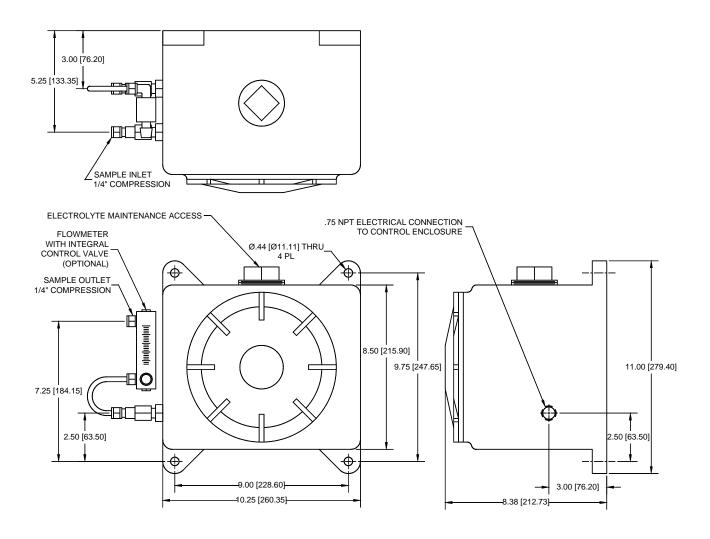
NEMA 7 Enclosure Mounting Dimensions
